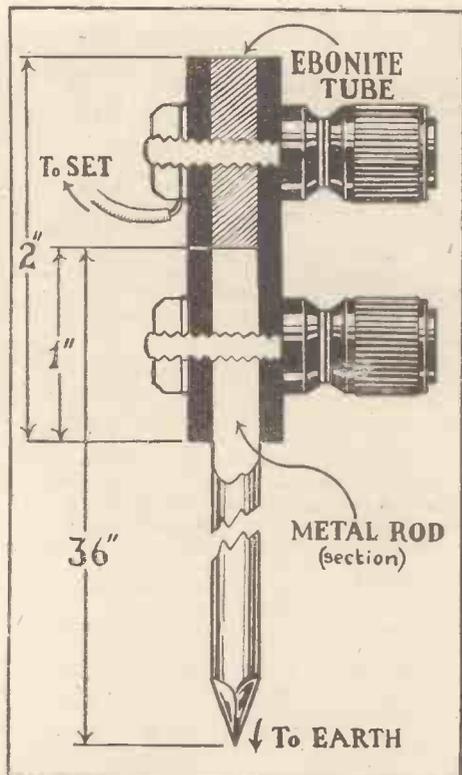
Handy little gadget you can make for easy loud-speaker extension using only a single wire
